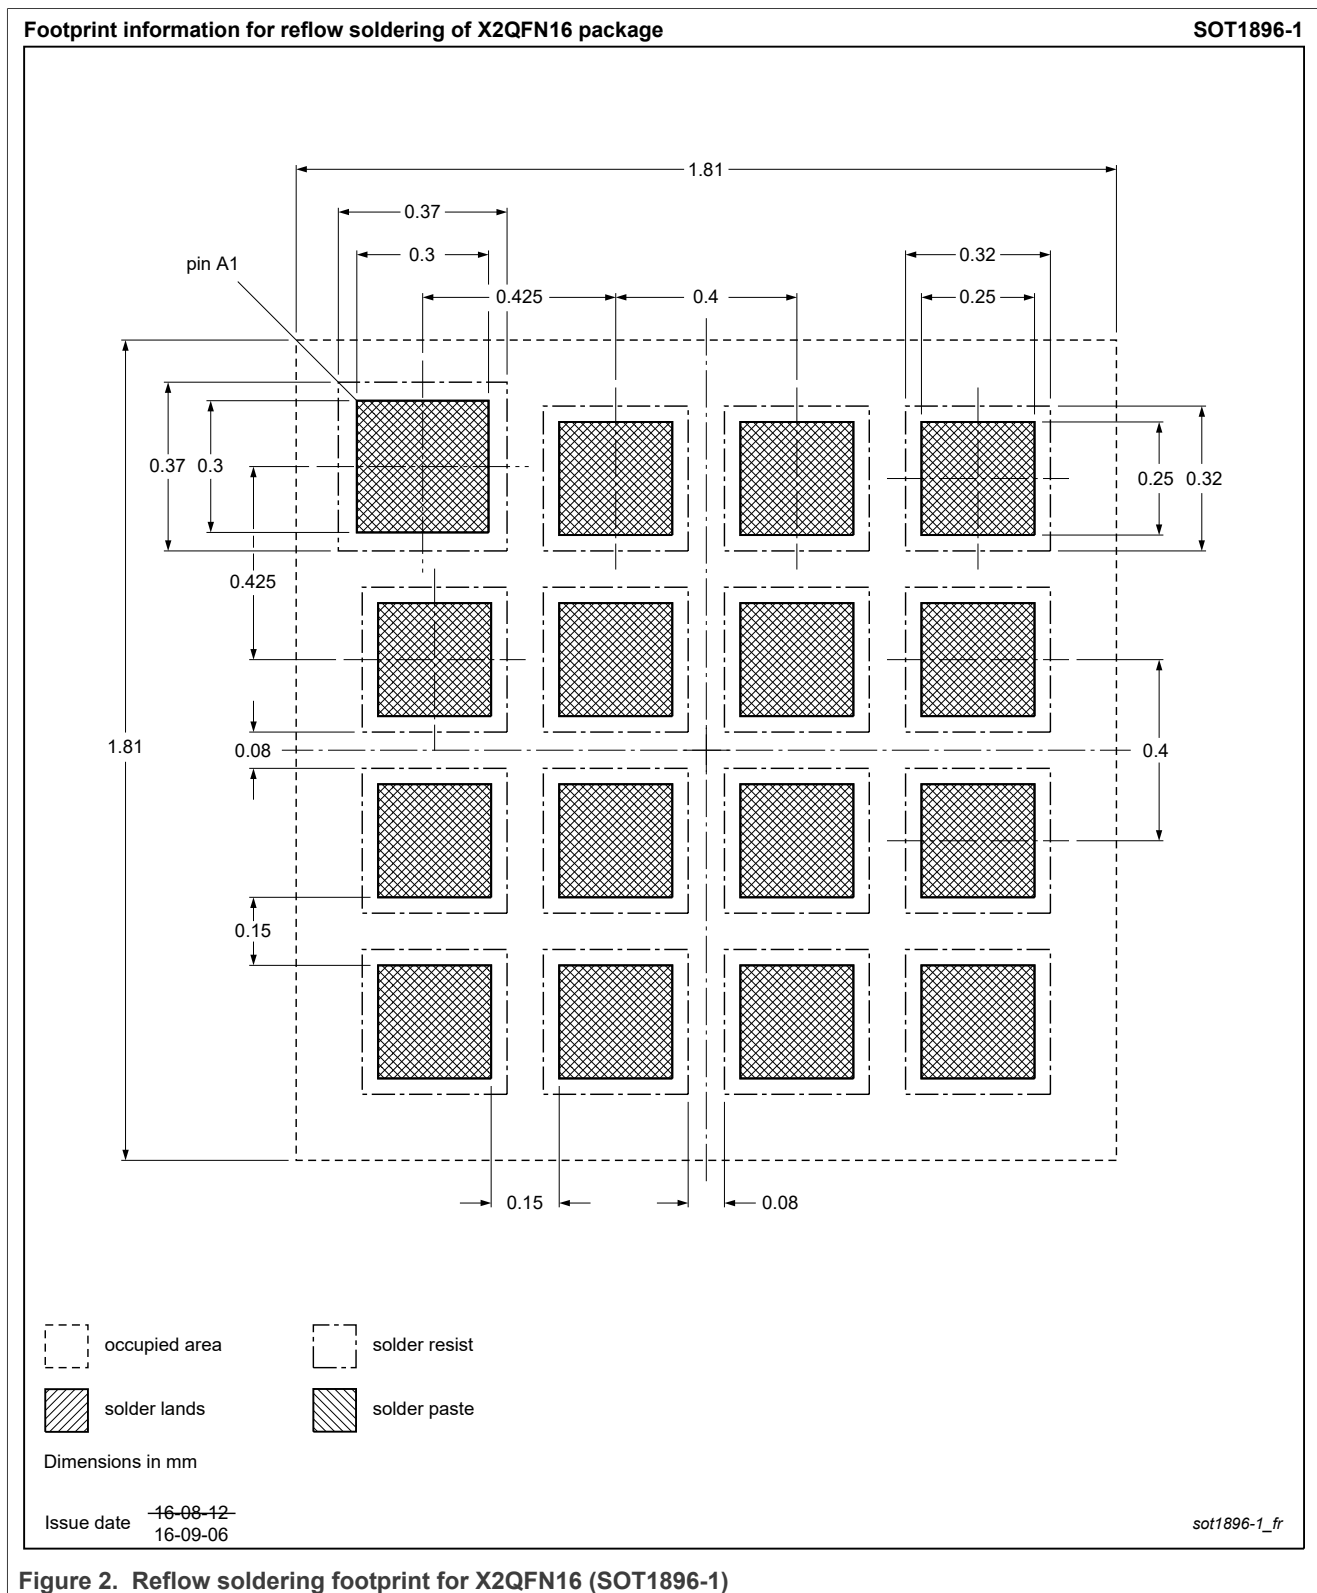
Reflow soldering footprint for X2QFN16 (SOT1896-1)
